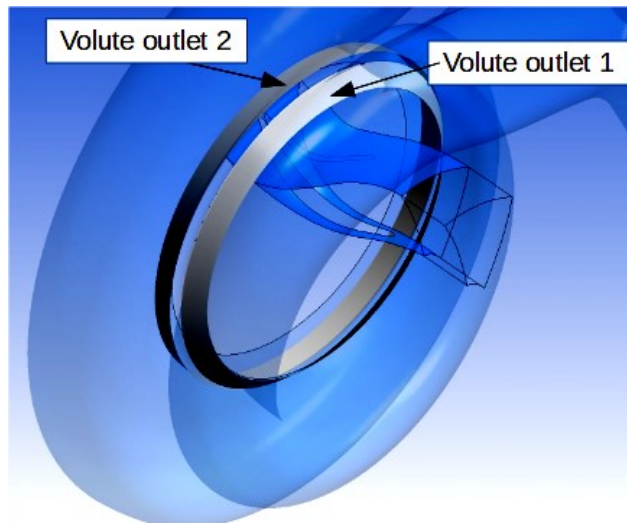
Revolution surfaces that identify each scroll outlet (1=shroud - 2=hub side)
